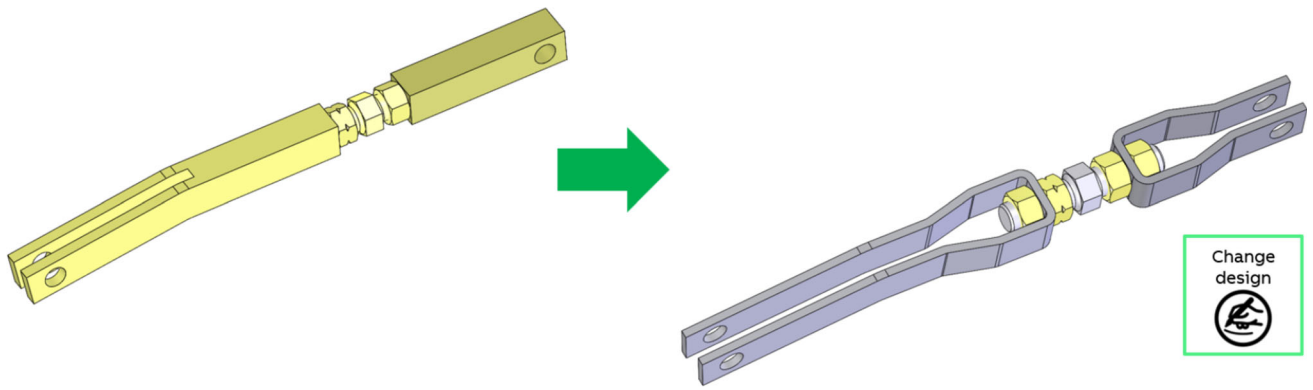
Sheet metal parts instead of a milled fully filed rectangular rod
